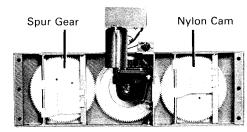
Rear View, 150-1000 Ampere Switch Mechanism
